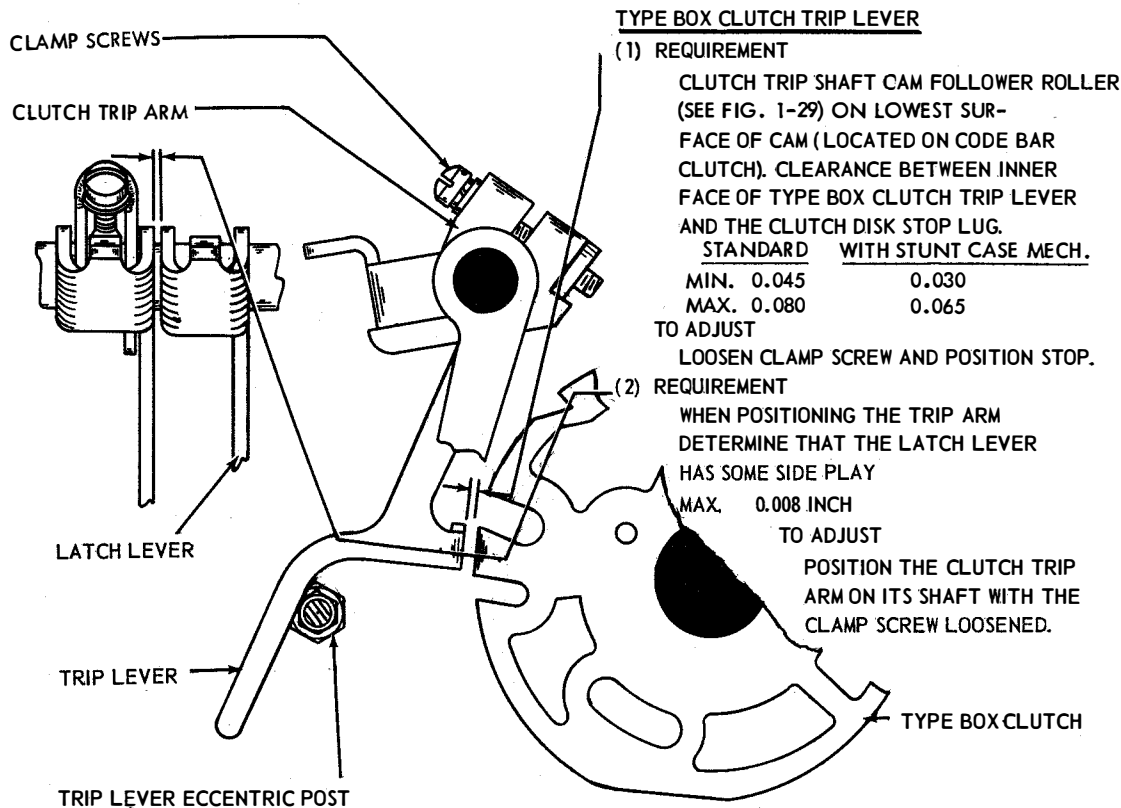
TYPING UNIT, TYPE BOX CLUTCH MECHANISM
